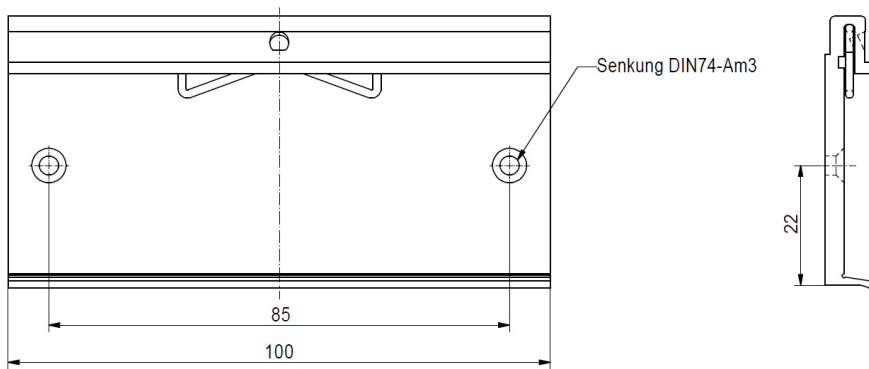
Details with dimensions of the DIN Rail mounting clip
